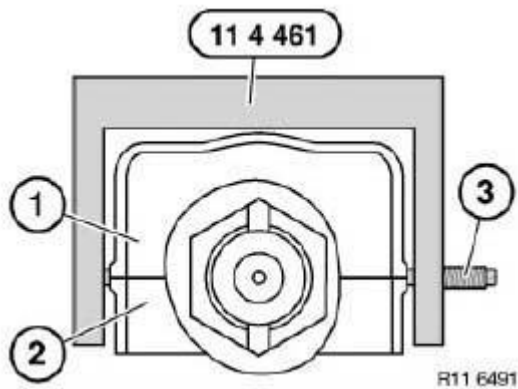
Identifying Special Tool (11 4 461), Lower Bearing Bank And Upper Bearing Bank
